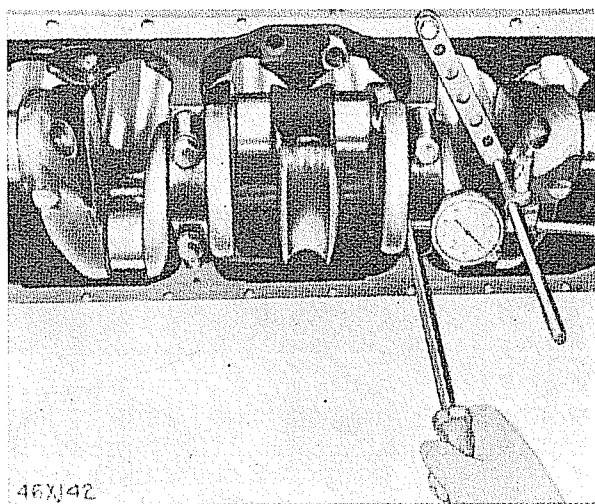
Checking Crankshaft End Play Using Dial Indicator.
